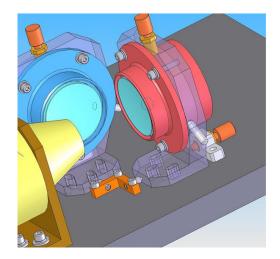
Top level assembly showing alignment jigs on two lens holders.
